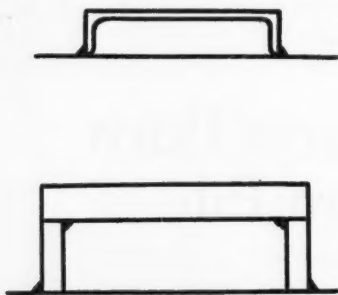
Two methods of using welded bosses as mounting pads
